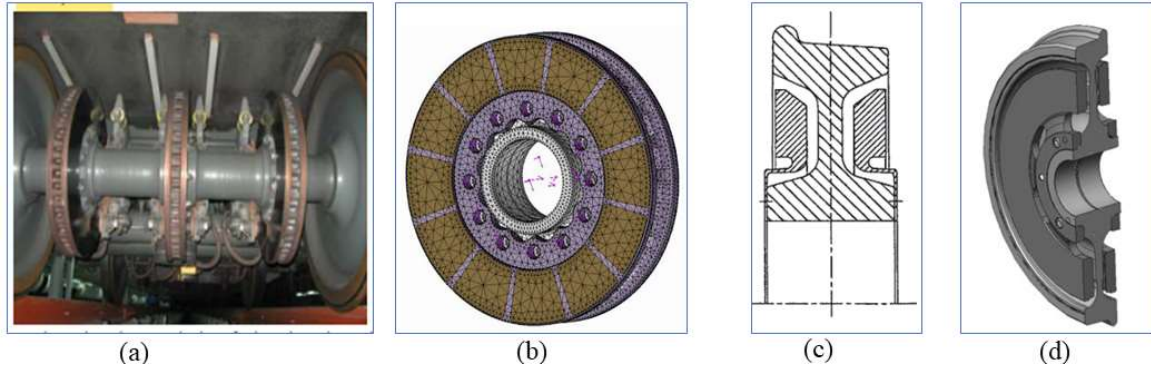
Hub-bolted disc brakes: axle mount (a) [58], (b) [59]), wheel mount (c) [11], (d) [60])
